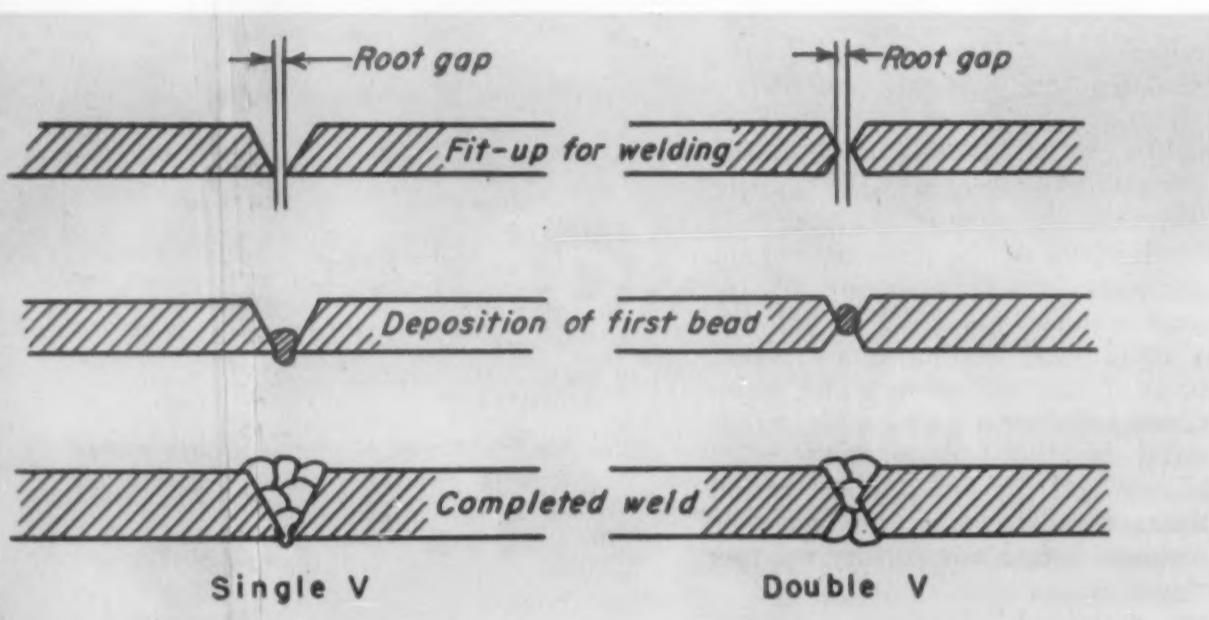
Fit-up of butt-joints for hot-gas welding.
